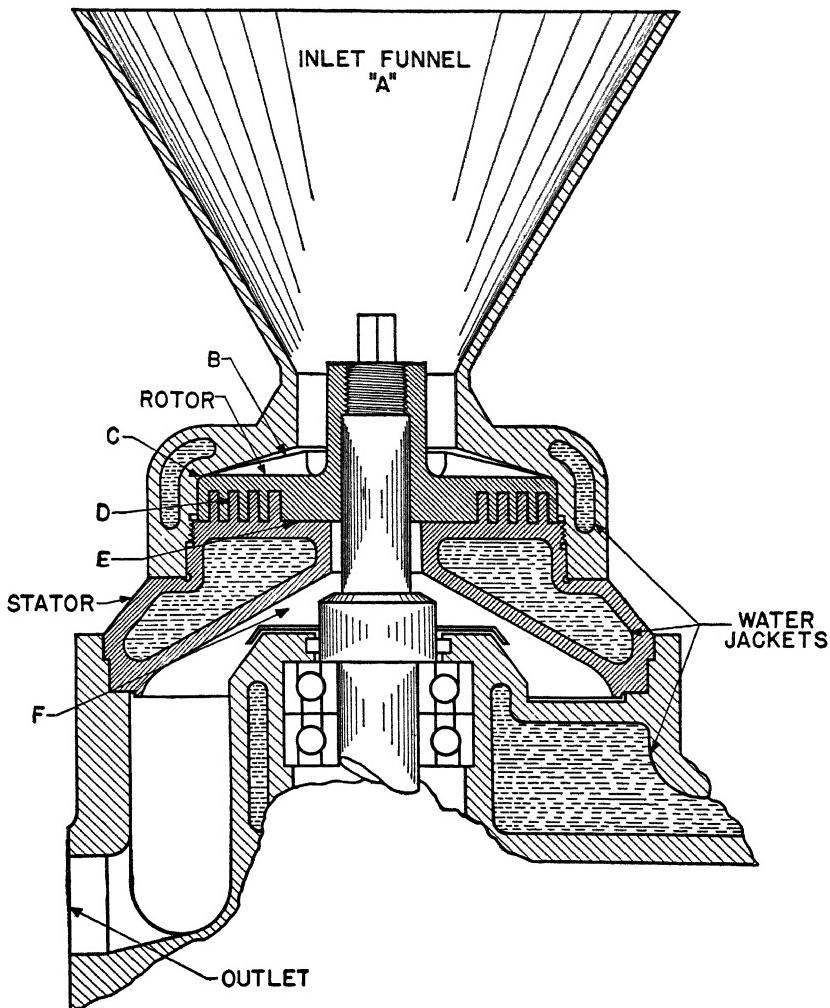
Cross-sectional view of colloid mill with special rotor-stator design. (A) Inlet; (B) impellers on rotor; (C) region where initial shearing takes place; (D) interlocking rings on rotor and stator; (E) smooth area between rotor and stator; (F) spillway. (Courtesy C. O. Bartlett & Snow Co.)
